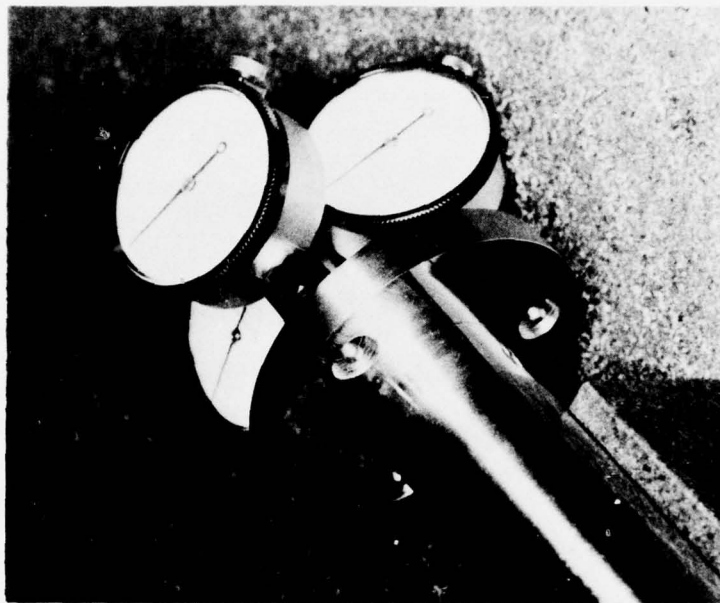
Close-up View of Alignment Device Showing the End Plate and Dial-Indicator Contact Points
